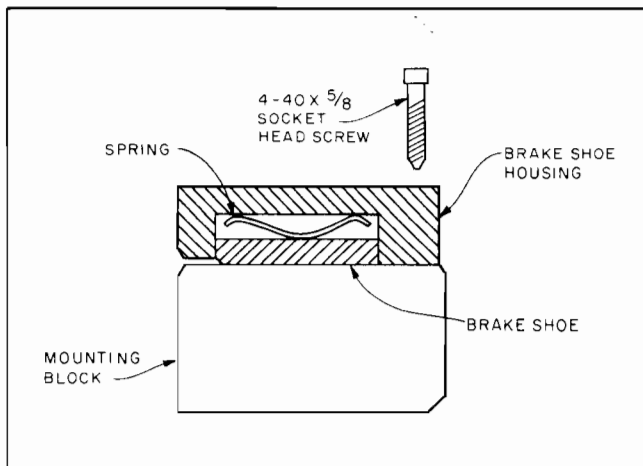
Proper Placement of Spring in Brake Shoe Housing
